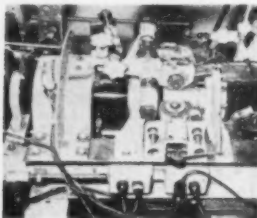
In tube-forming unit, film is pulled through the ring at left and becomes a tube that is moved by inner and outer rolls, centre. Cement is applied to scarfed joint by a hypodermic tube not shown here.
